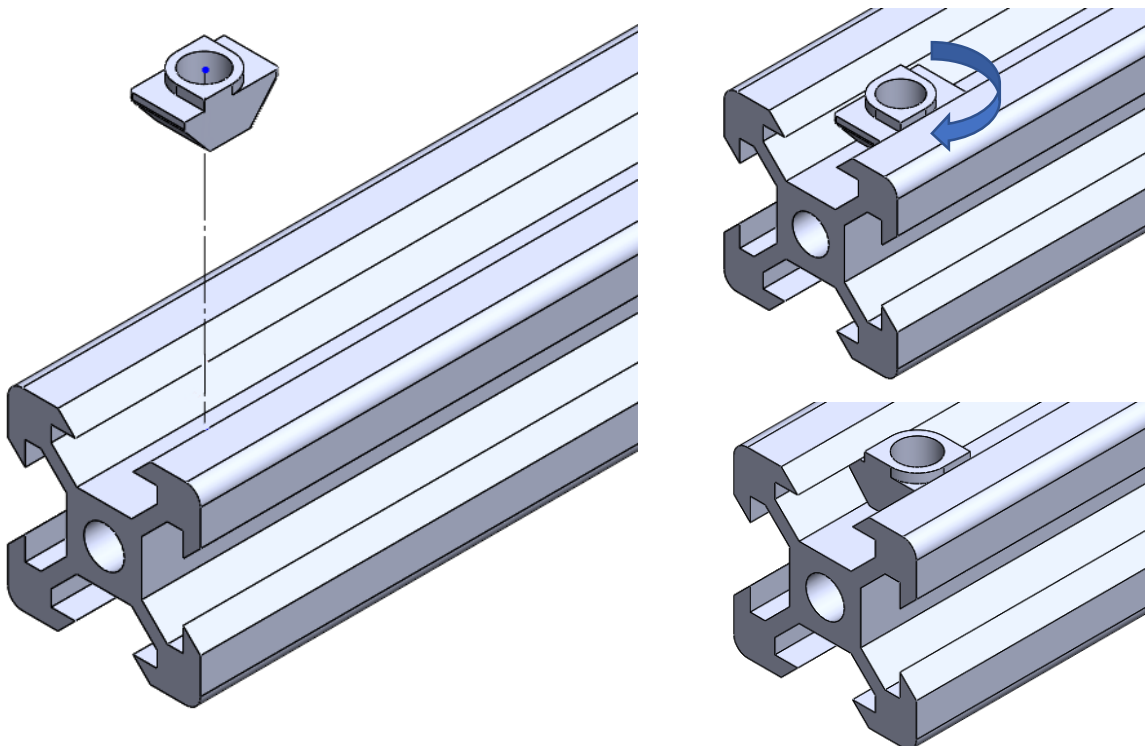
Exploded isometric assembly of turn T-nut and V-slot rail
